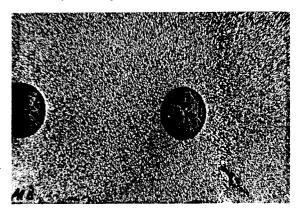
Close up showing exfoliation more clearly. Further 0.010 ins. (0.254 mm) had to be removed by dressing.
